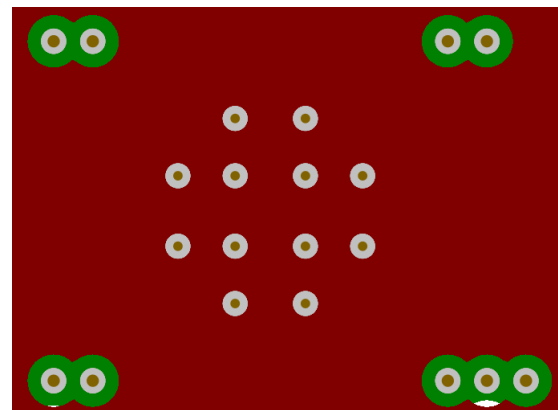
PCB Layout Example for LMK1D2108L, GND Layer
